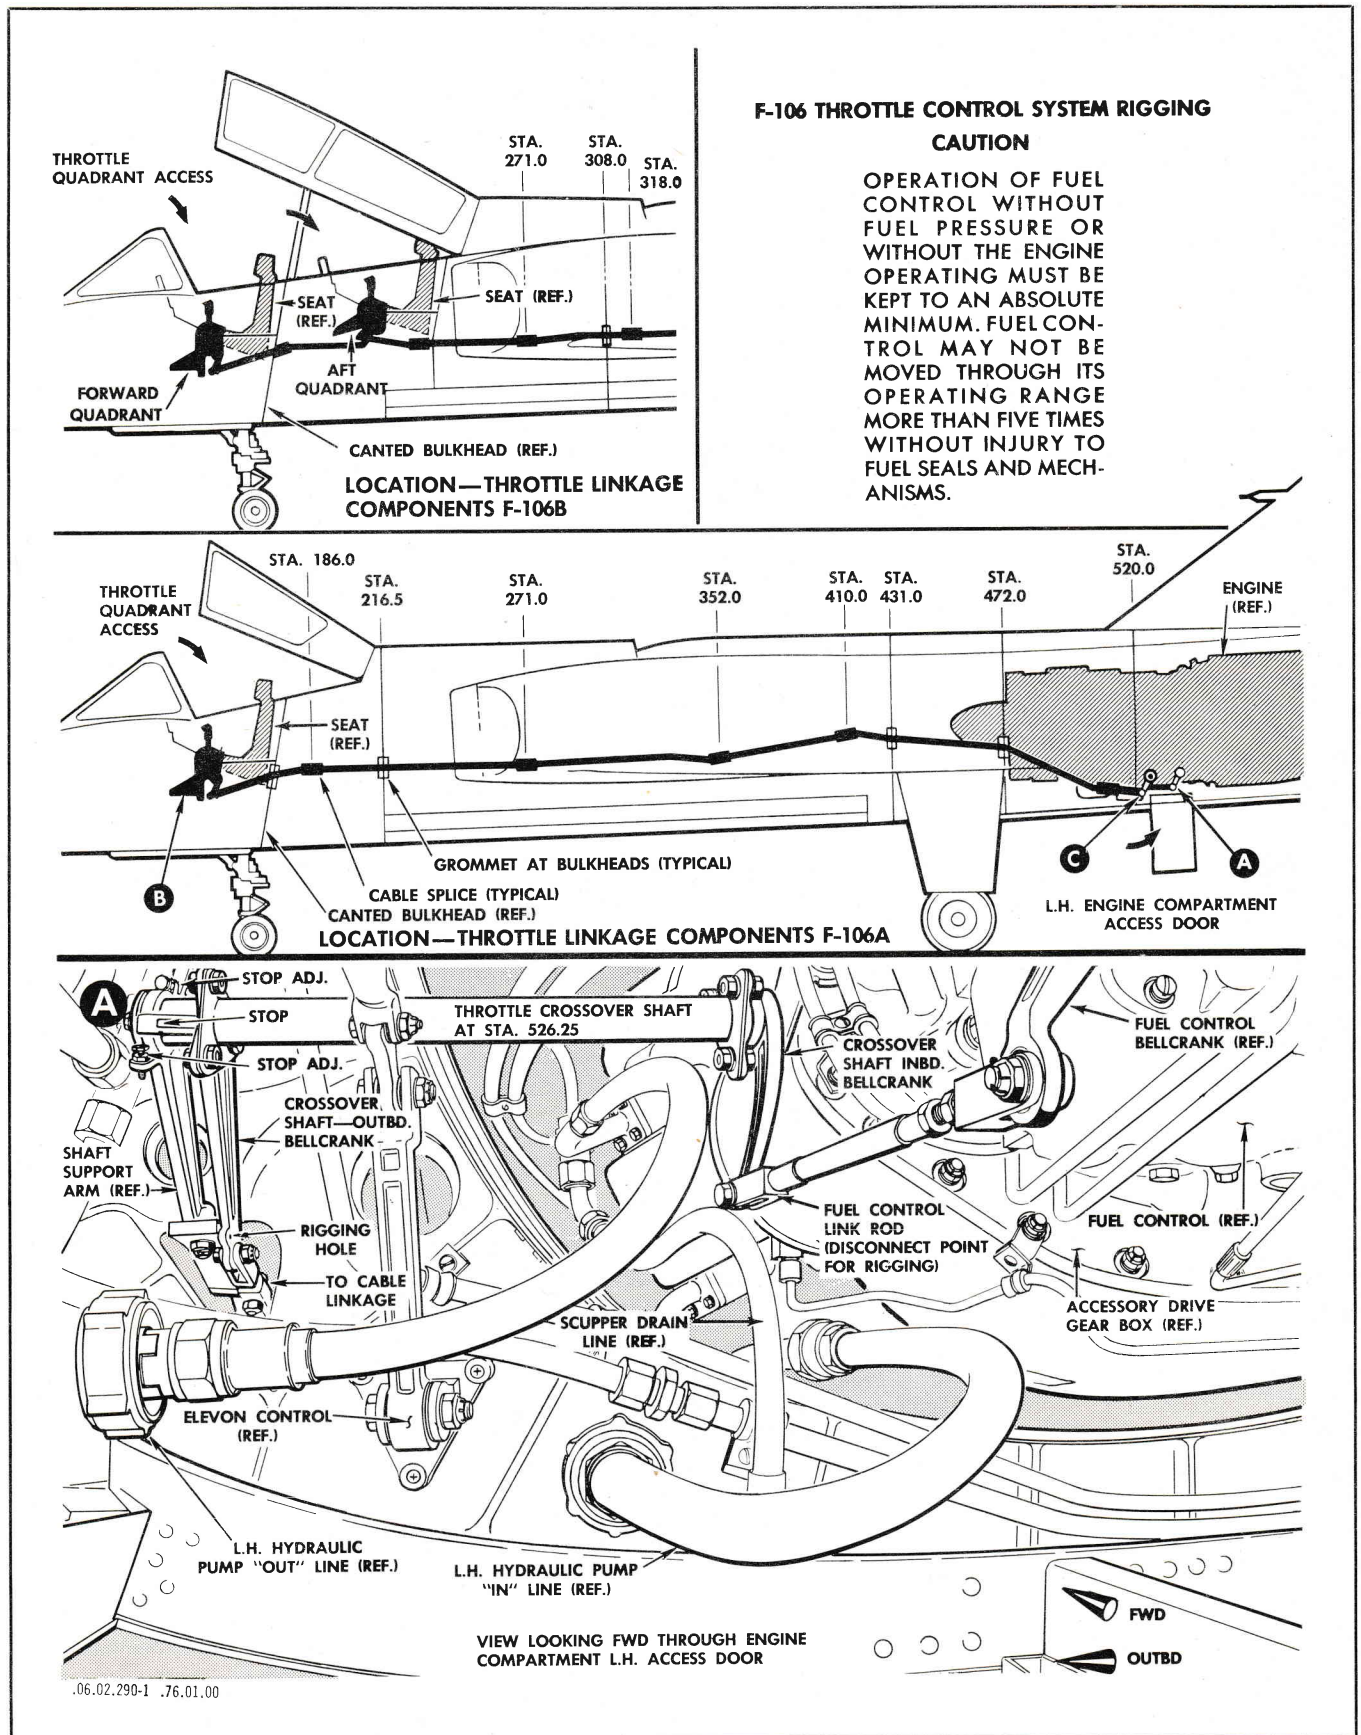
Throttle Control System Rigging (Sheet 1 of 8)
